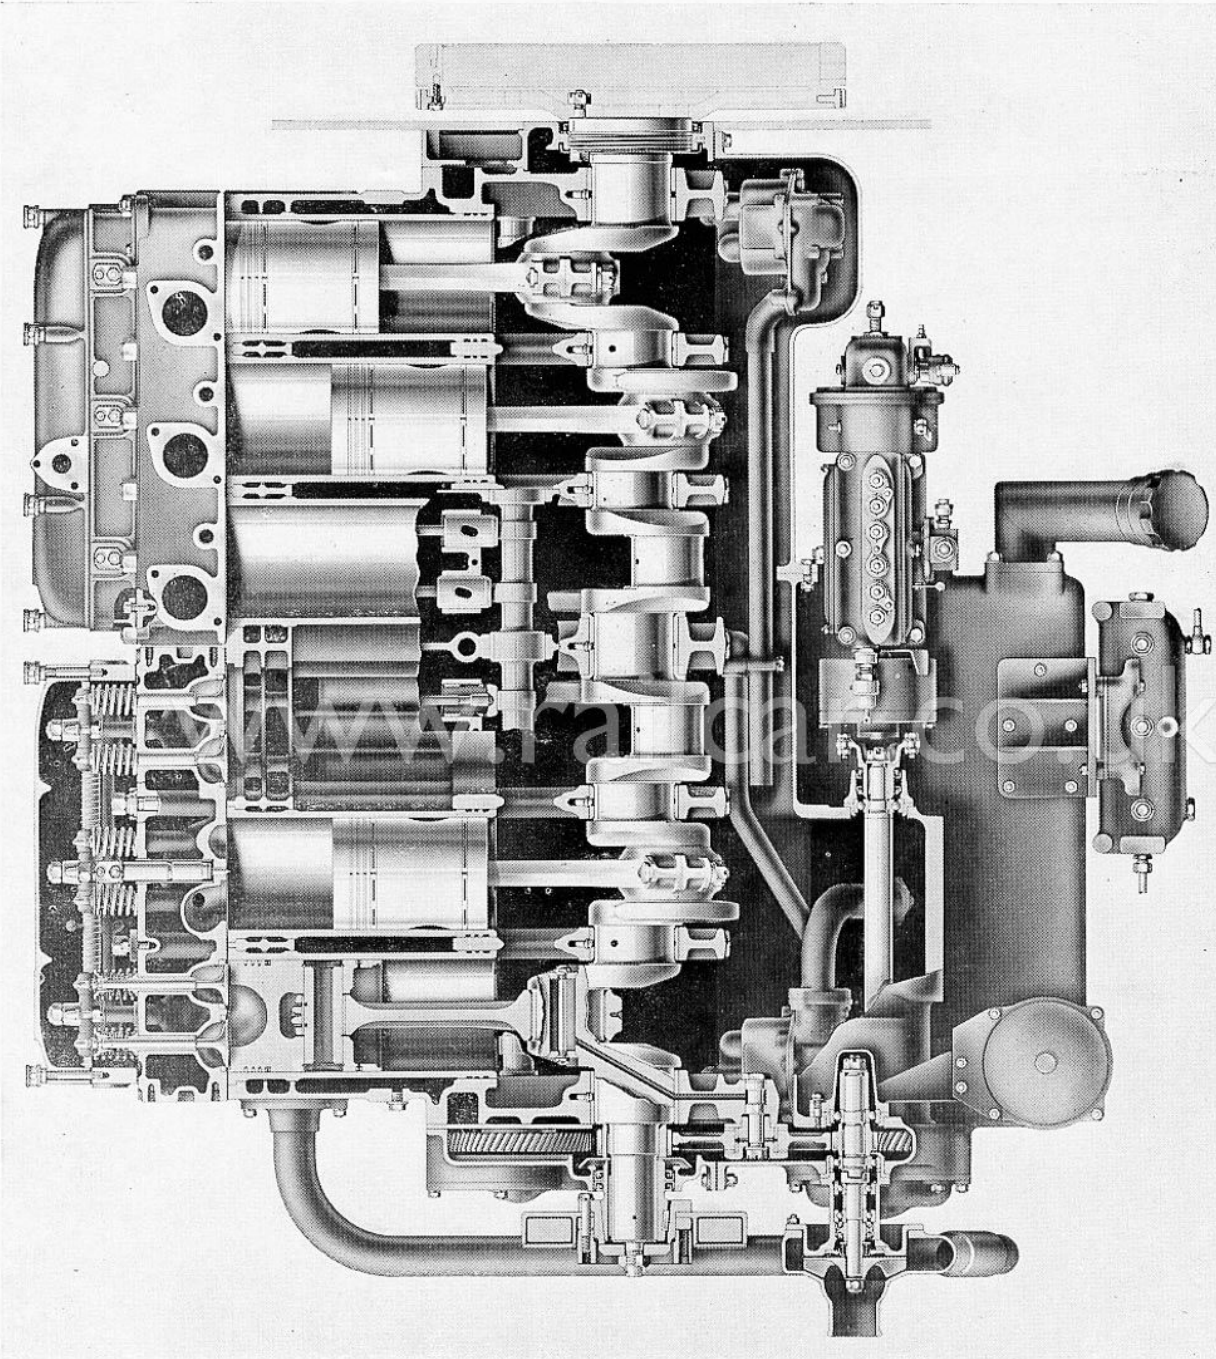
SECTION THROUGH HORIZONTAL ENGINE
